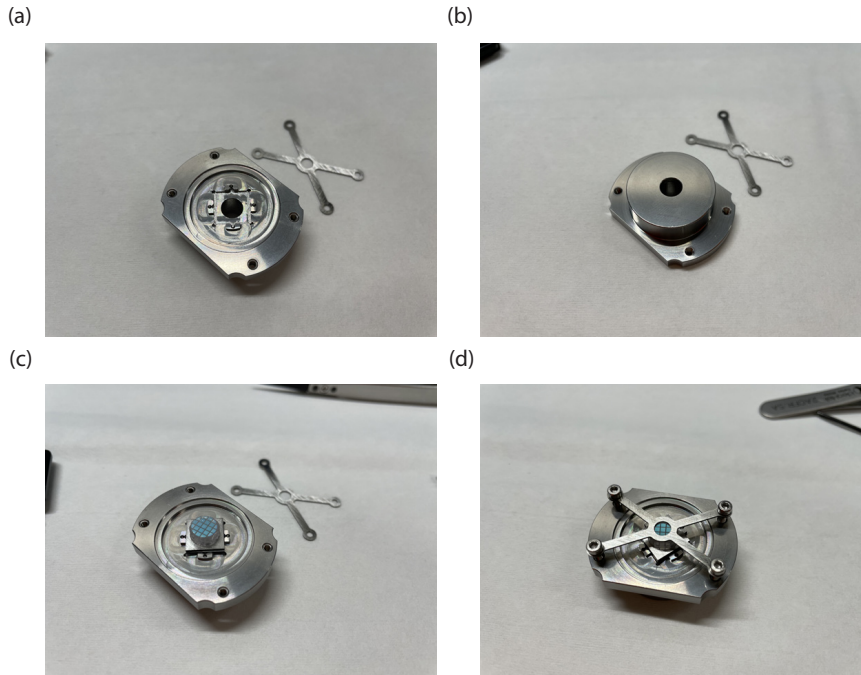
Photographs of the MIM assembly holder (a) top side and (b) bottom side. Photographs of the MIM assembly mounted on top of the holder (c) without and (d) with the stainless steel clamp.
